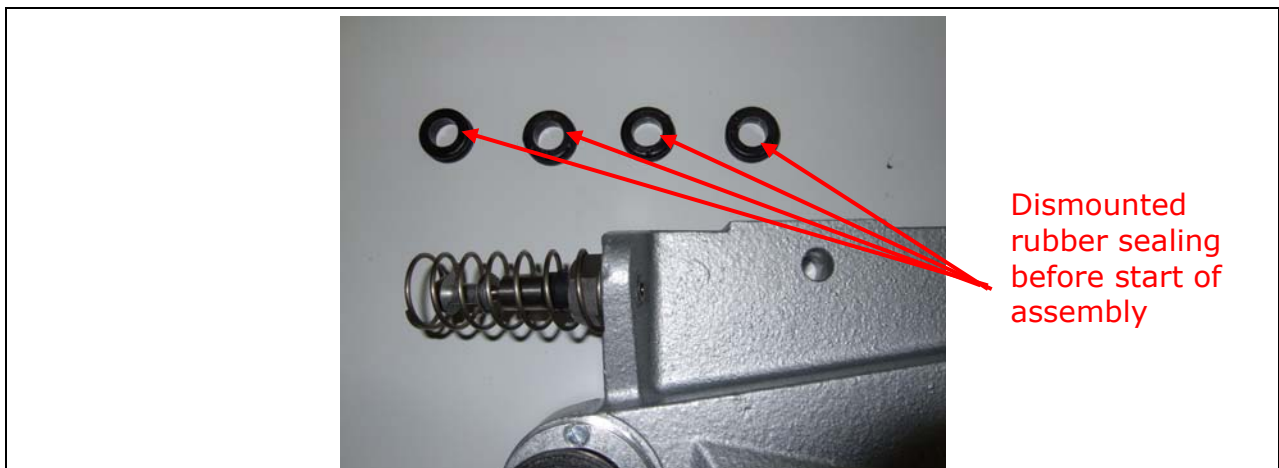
Step 5 is to pull out the gaskets before the carrier plate is mounted
